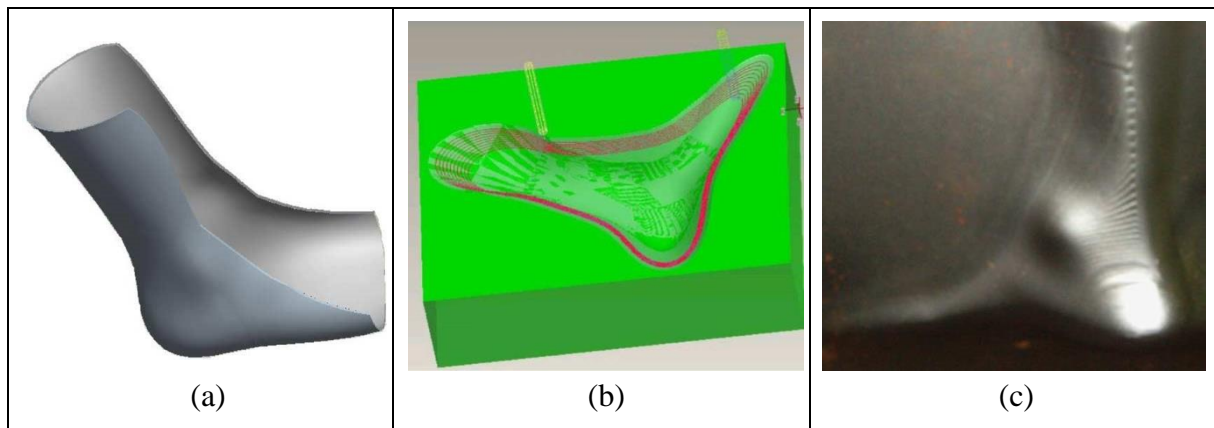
Ankle support brace (a) designed CAD model; (b) CNC Tool path (c) Final product[25].
